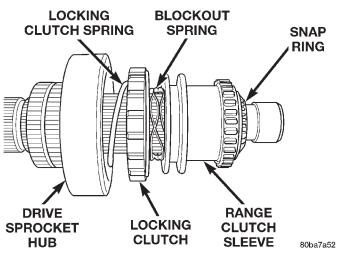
Range Clutch Sleeve, Blockout Spring, Locking Clutch and Spring
